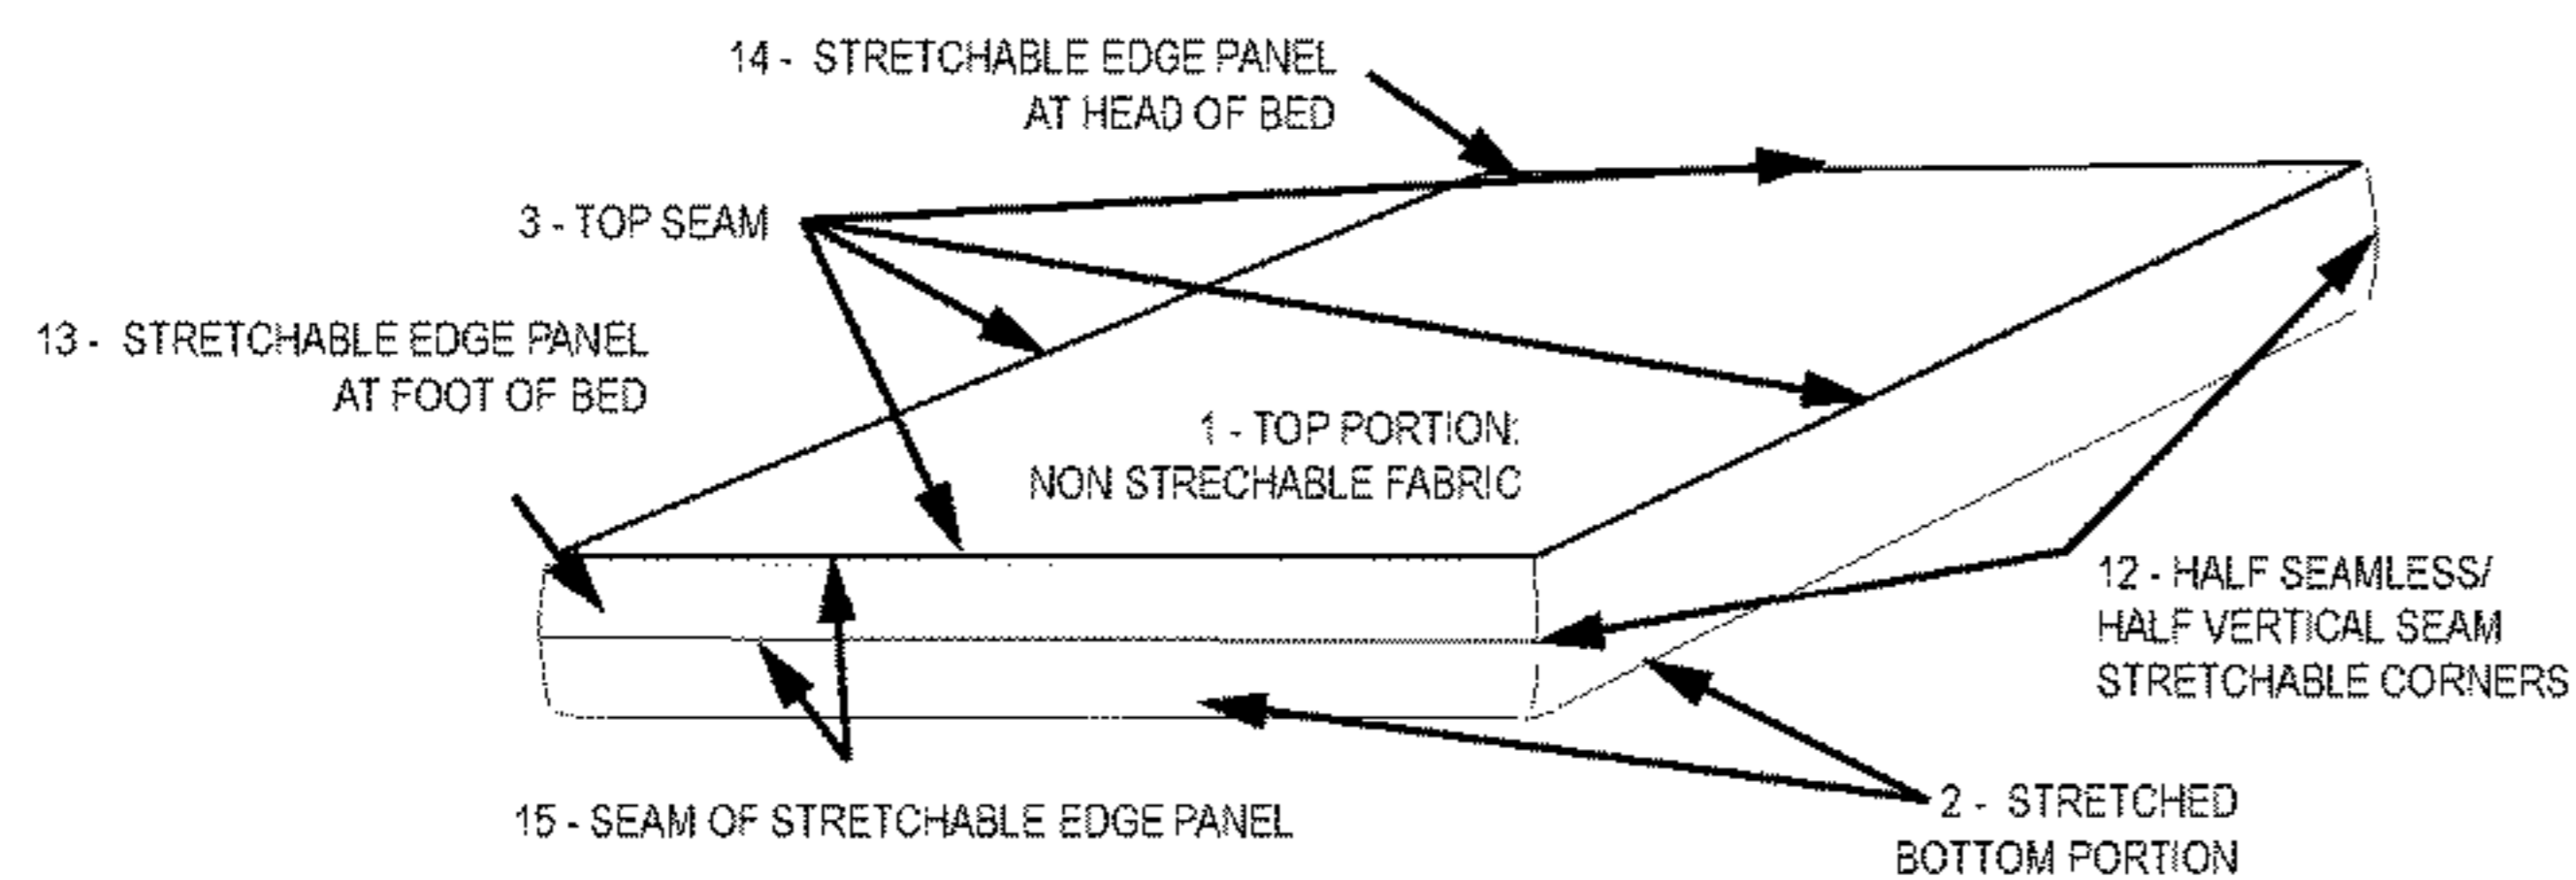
UNSTRETCHED EXPLODED SIDE VIEW
